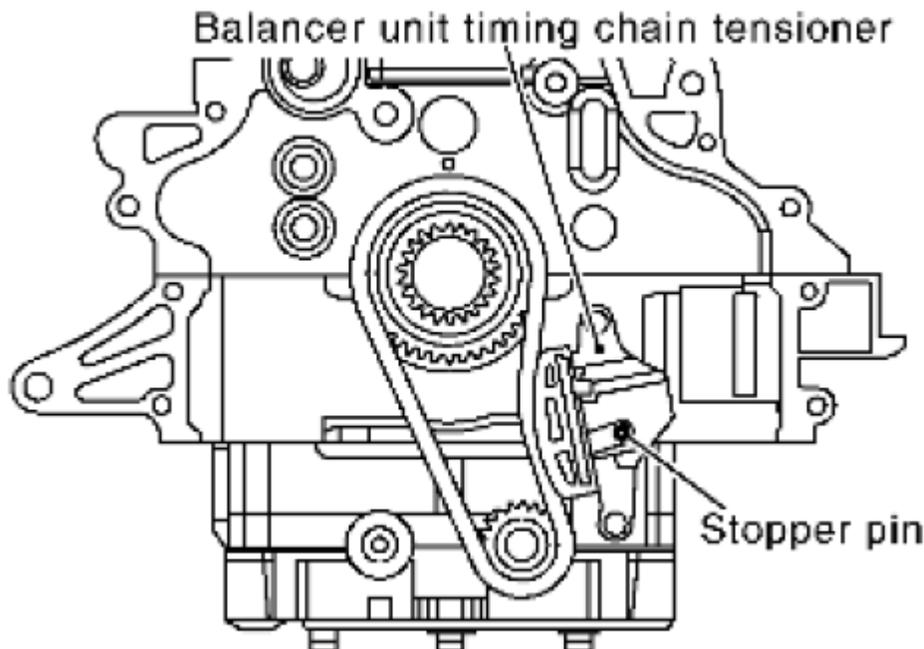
Identifying Balancer Unit Timing Chain Tensioner And Stopper Pin
